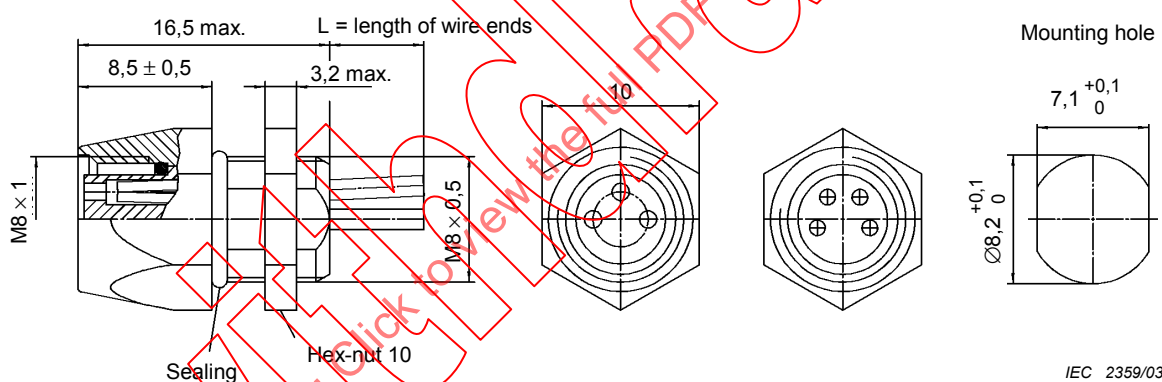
Fixed connector with wire ends, single hole rear mounting, female contacts
